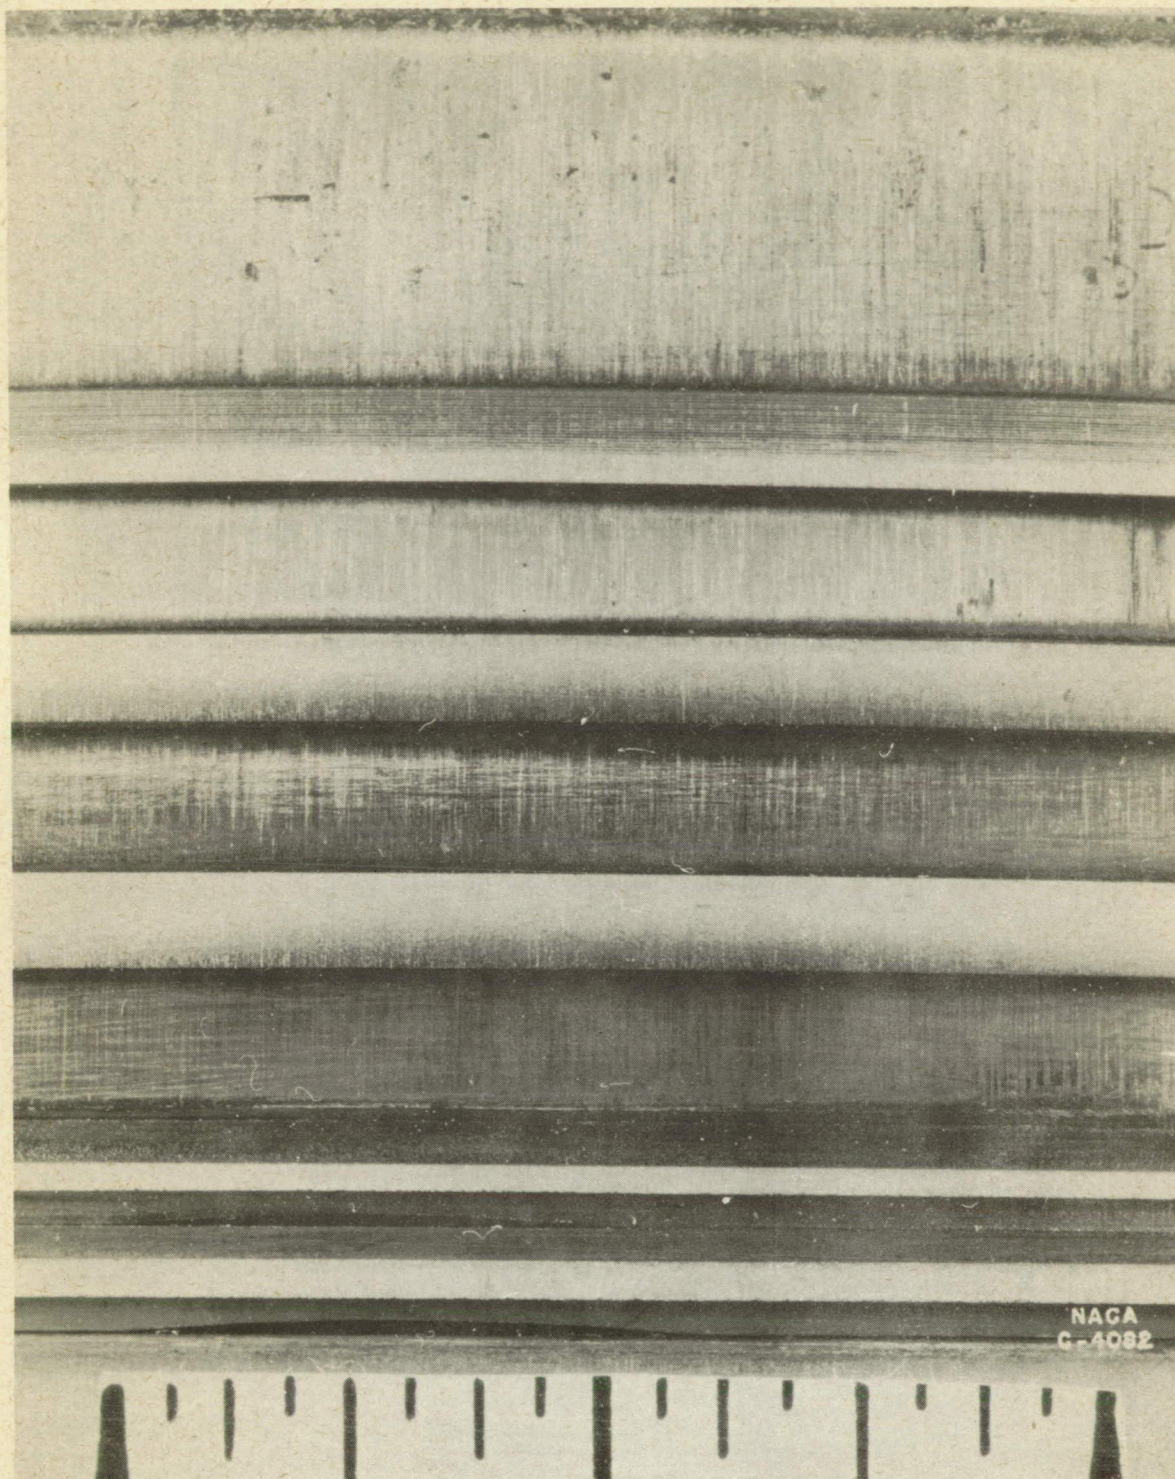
Condition of surface of top five rings, 180° from gaps, after operation in previously used straight-bore porous chrome-plated cylinder barrel after test 5. The top ring has a 1° taper face; the other rings are flat-face standard parts. X5.
